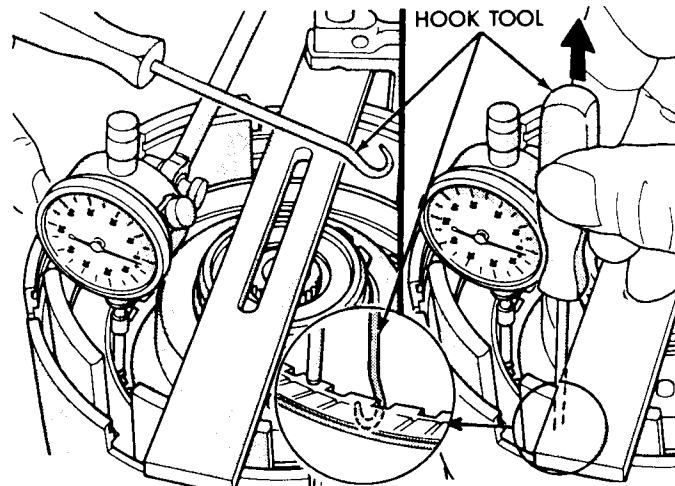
Use Hook Tool to Raise One Clutch Disc
